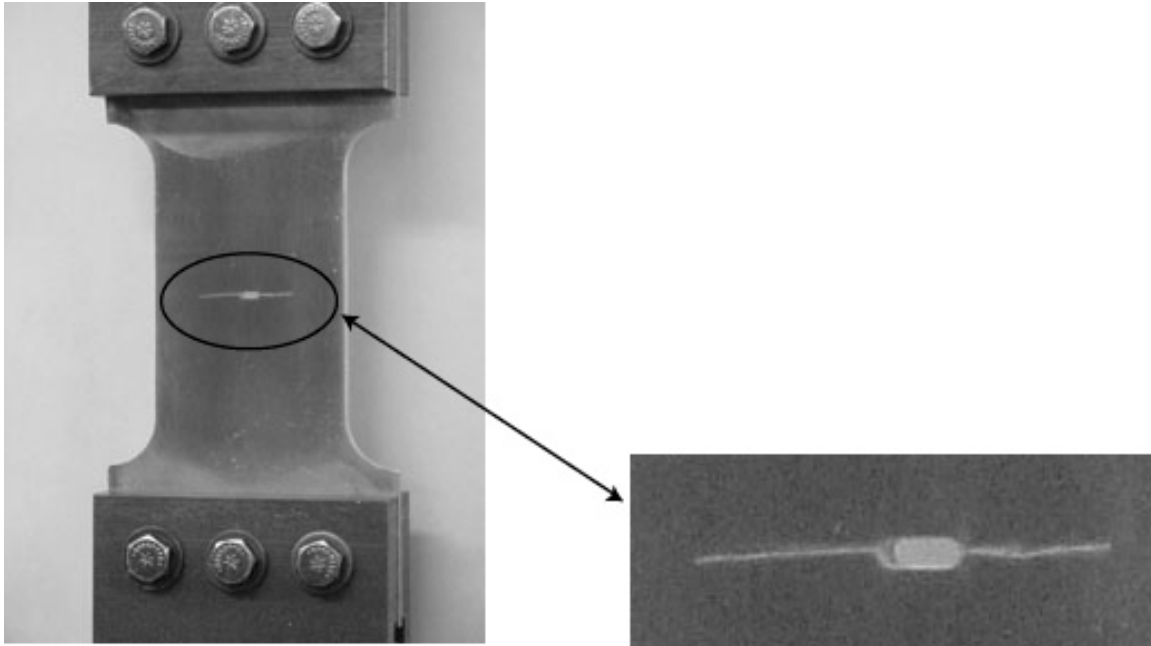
Typical specimen with fatigue crack. Detail shows machined notch and fatigue cracks
